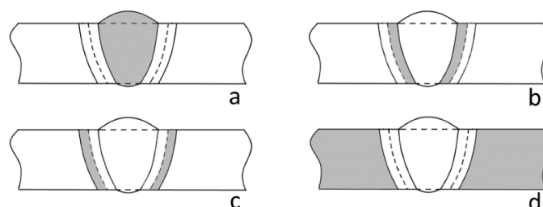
Parts of the welded joint: a) weld metal, b) HAZ with coarse grain, c) HAZ and d) base metal.
